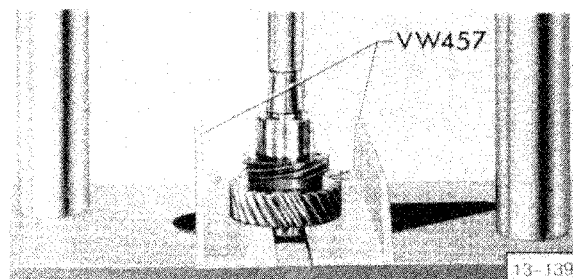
Distributor drive gear/crankshaft timing gear, removing
